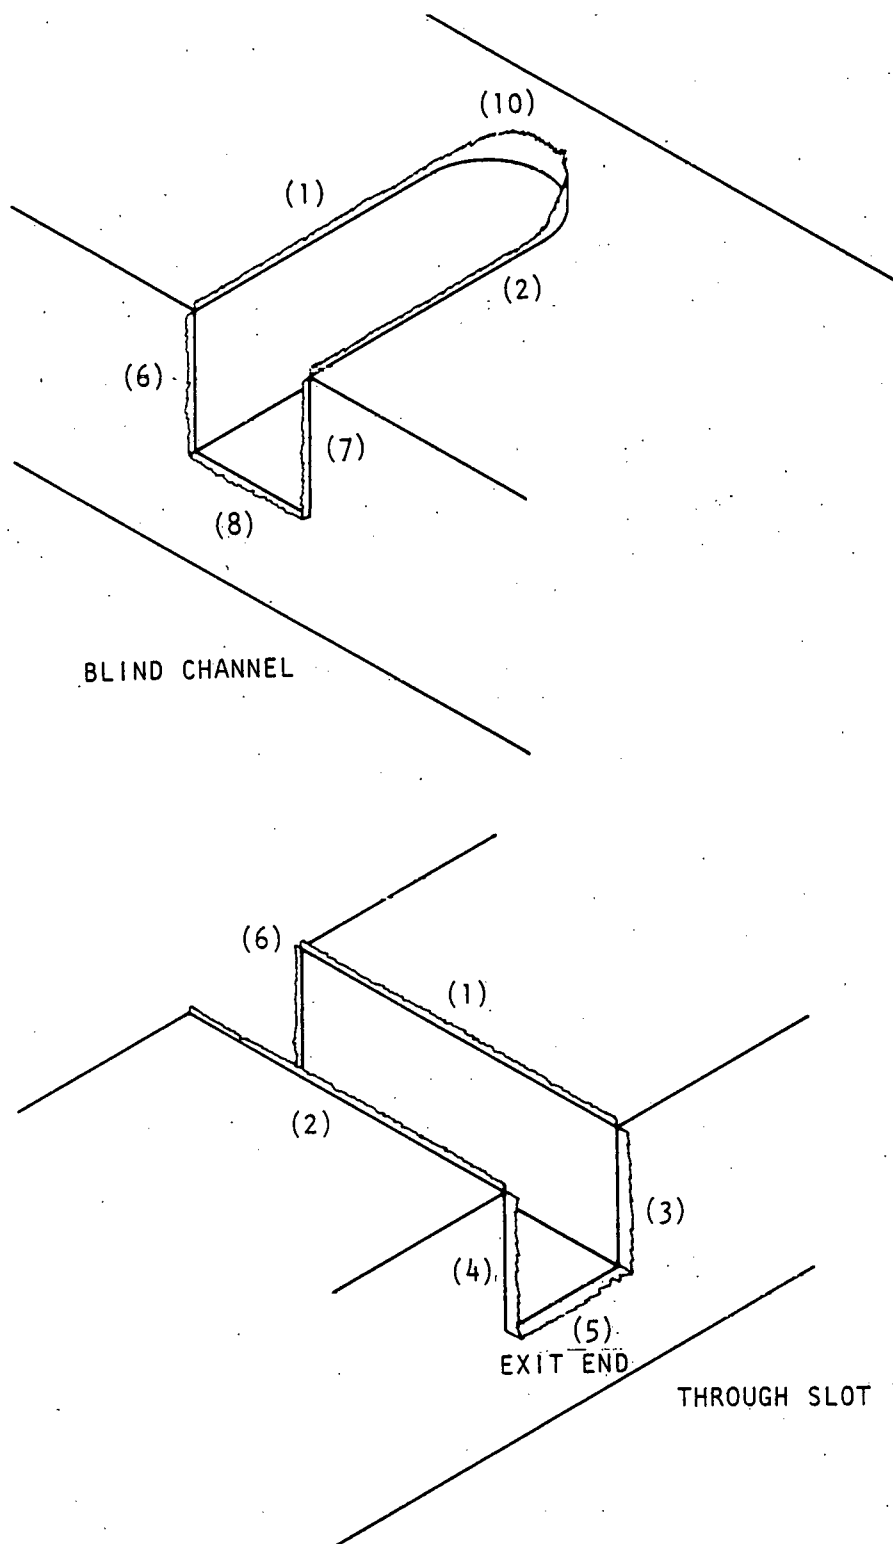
Identification of Burr Locations in Slots Produced by End Milling
